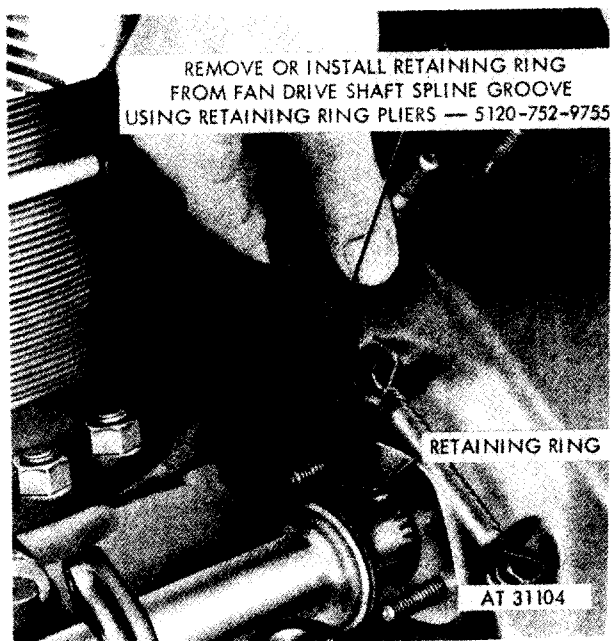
Removing or installing horizontal fan drive shaft retaining ring using retaining ring pliers—5120-752-9755.
